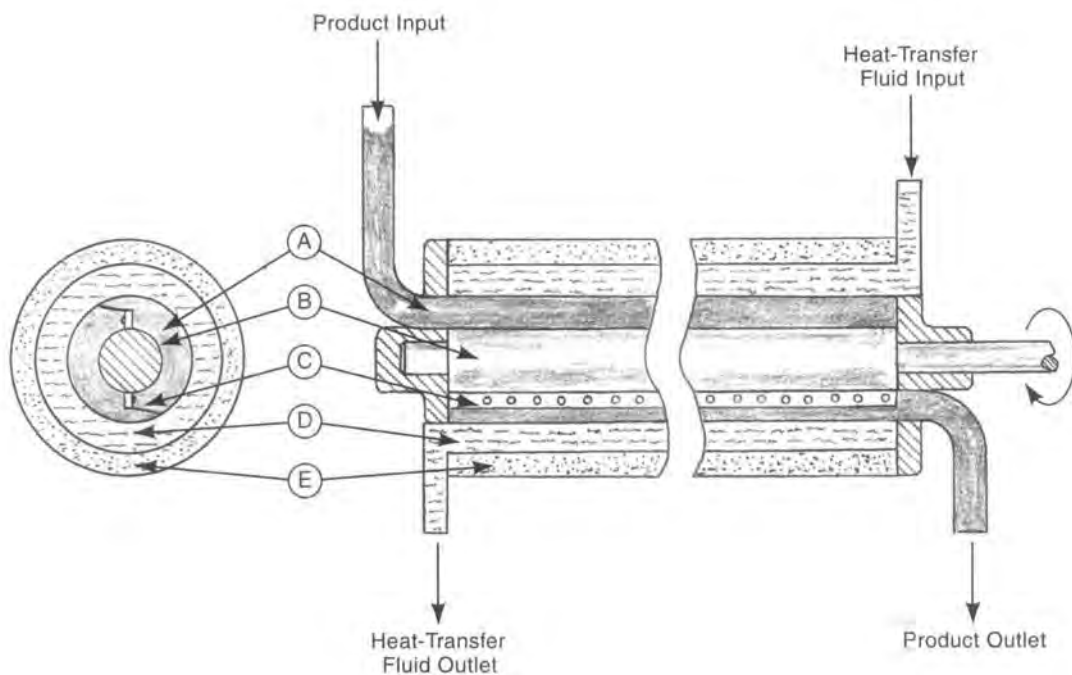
E4 Scraped-surface heat exchanger in two cross-sectional views: (A) product, (B) rotating shaft, (C) scraper blades, (D) heat-transfer fluid, (E) insulation.
